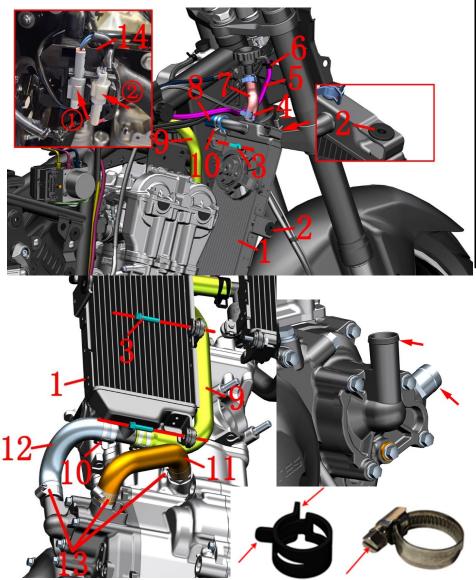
CO	OOLING SYSTEM	Water tank assembly 1	СНК	(0)
